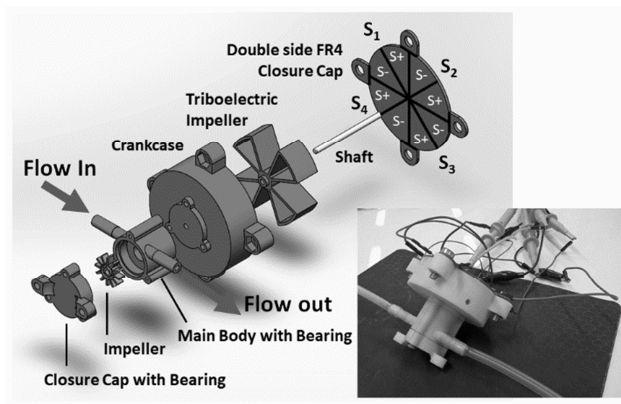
Exploded 3D sketch of the proposed TEF prototype. The fully assembled prototype is shown in the inset.
